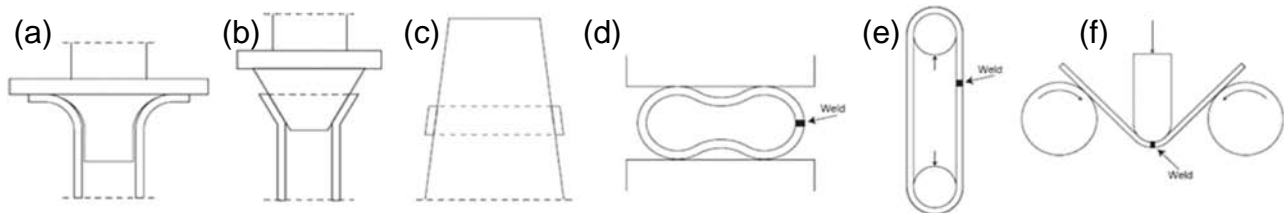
Some examples of technological testing of tubes (a) flange test, (b) flaring test, (c) ring expansion test, (d) flattening test, (e) ring tensile test and (f) root bend test.
